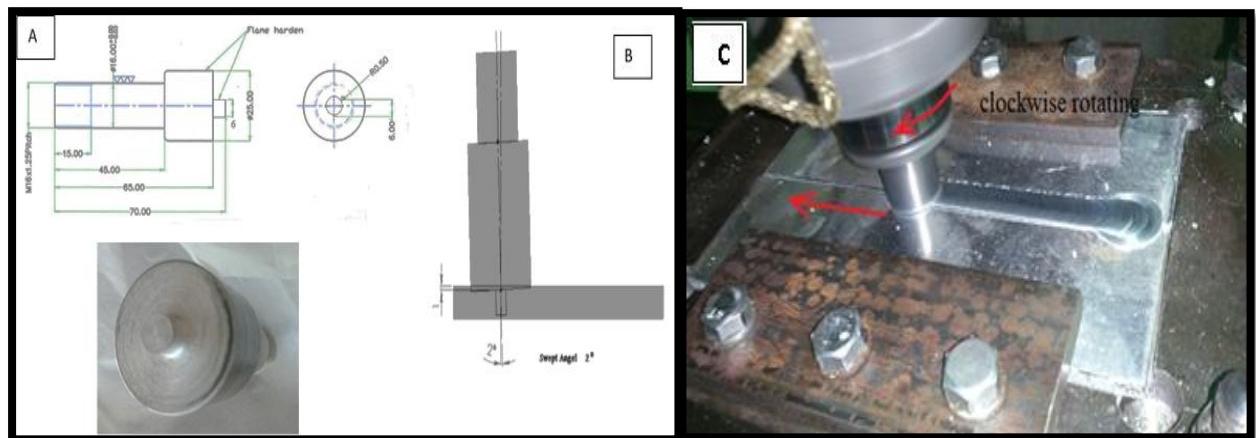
A-FSW tool used in the study with dimensions. B- Tool tilt angle. C-process photograph.
